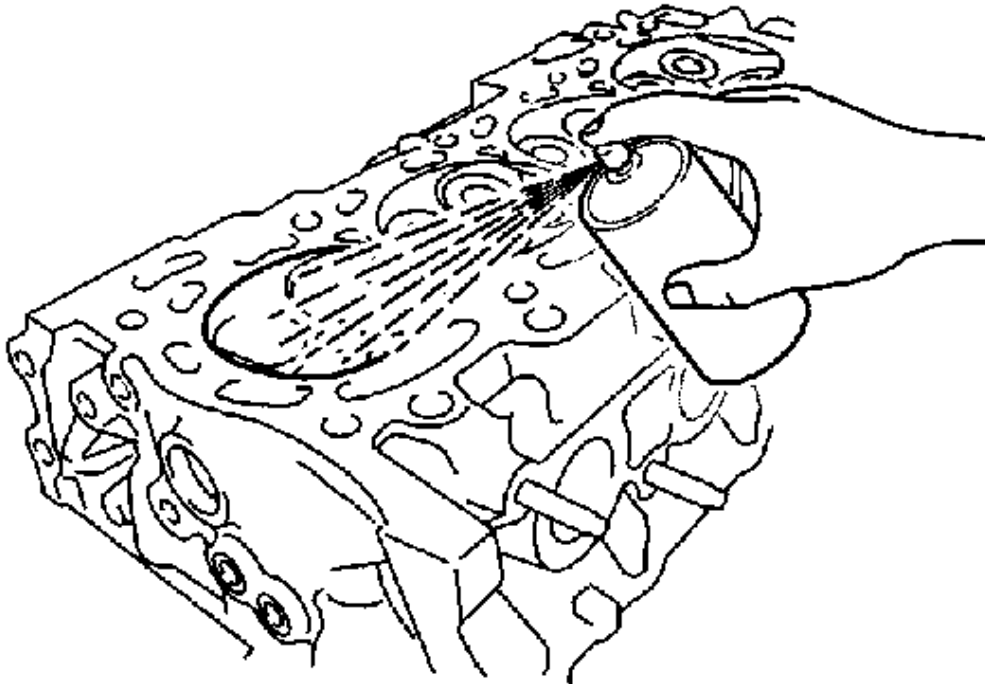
Inspecting Intake/Exhaust Ports For Cracks
